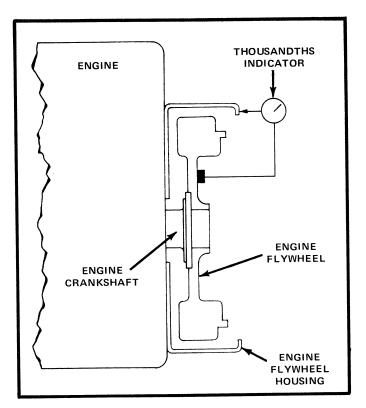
Checking the Face of the Engine Flywheel Housing.
